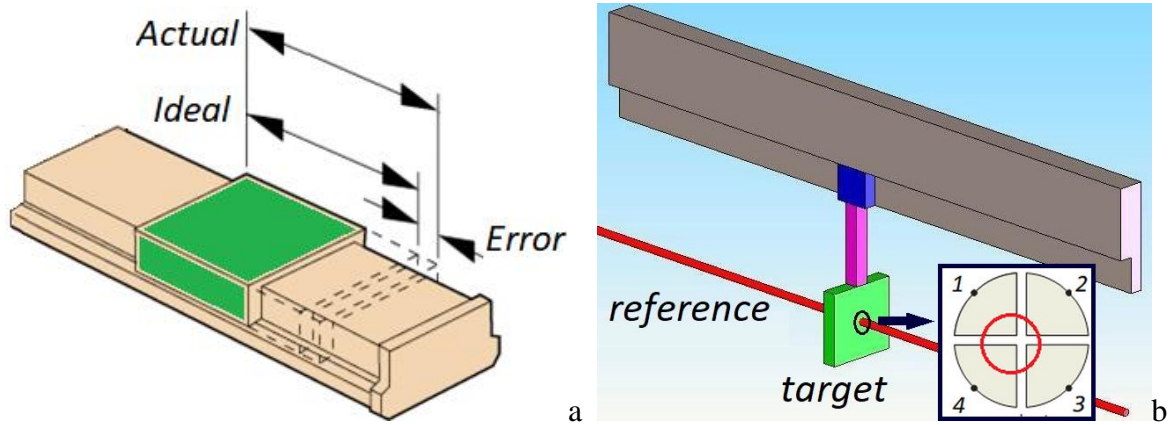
(a) CNC machine tool axis positioning error (b) Laser based alignment error of a tool
